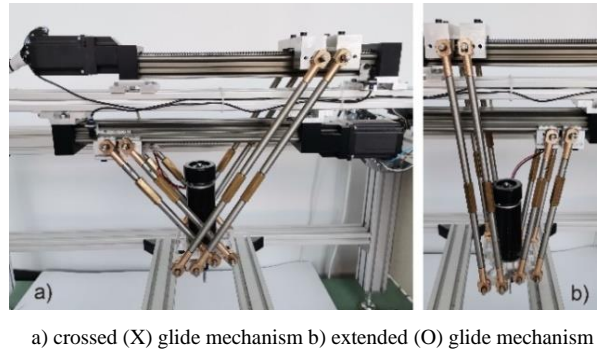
Configured prototype of the machine with O-X glide hybrid mechanism [6]
